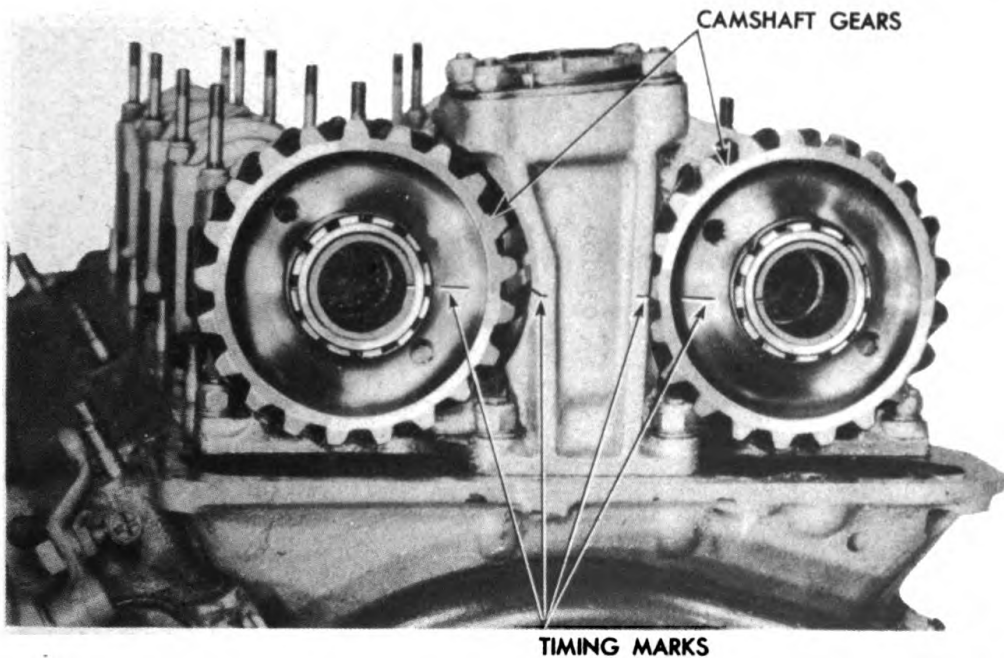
Setting Camshaft Timing With Camshaft Turning Wrench (41-W-2964-300)
